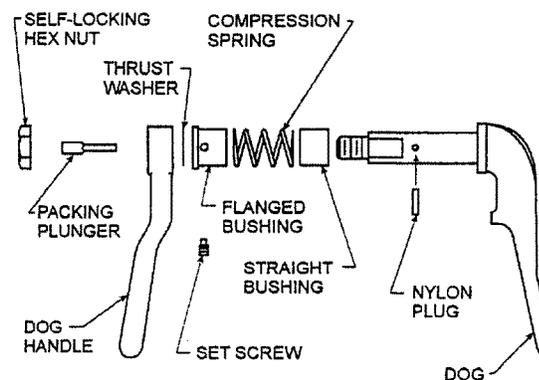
A. Individual Dog Assembly with Self-Lubricating Bushings
